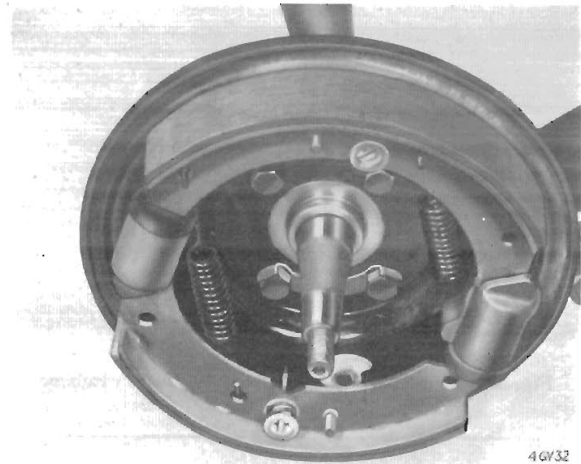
Locking tabs securing backing plate and steering arm bolts
